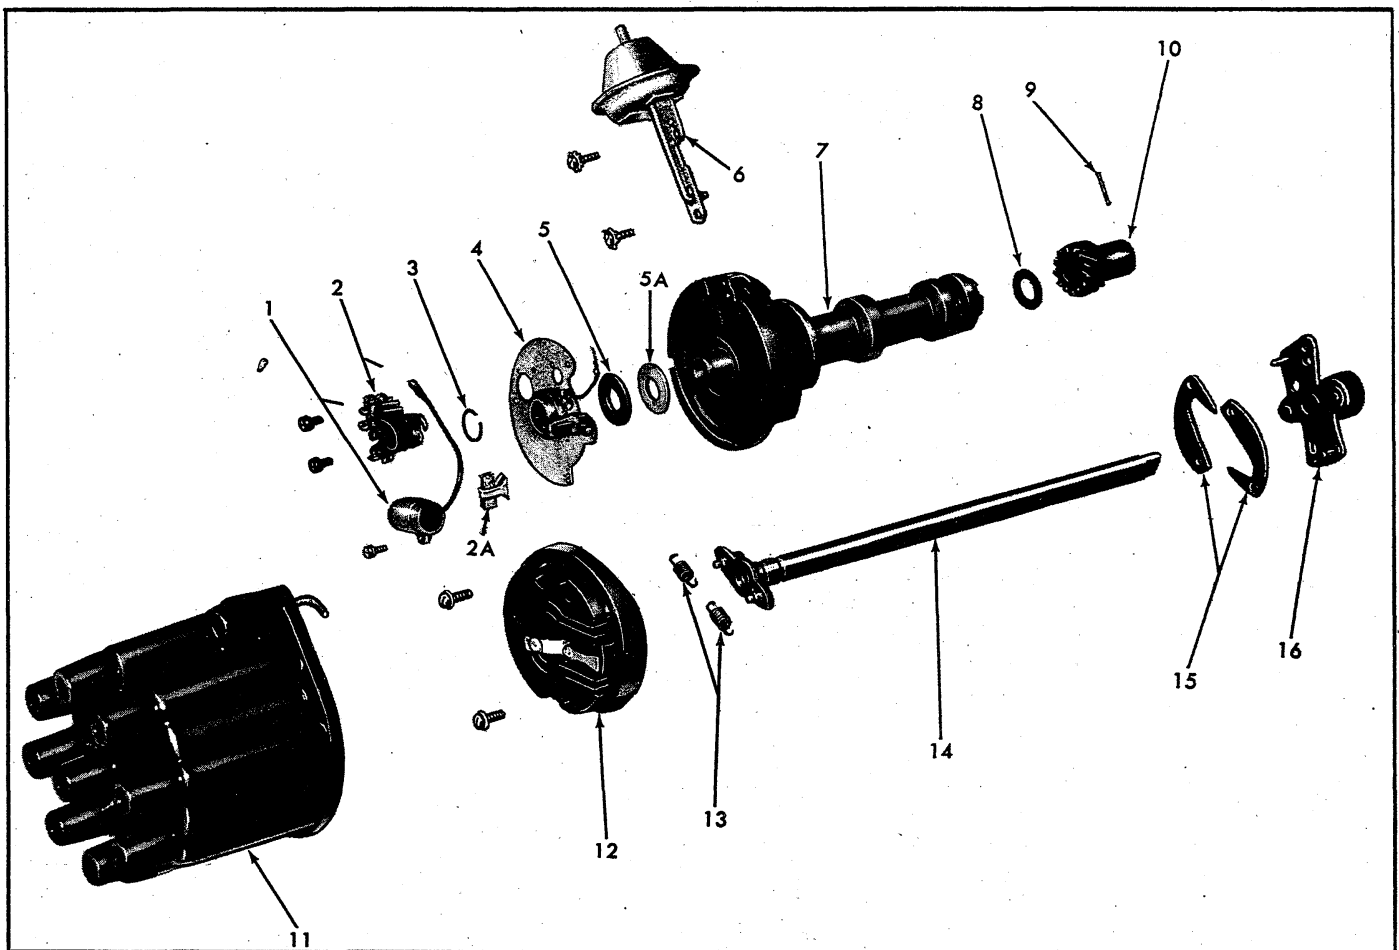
V-8 Distributor (Typical)—Exploded View
